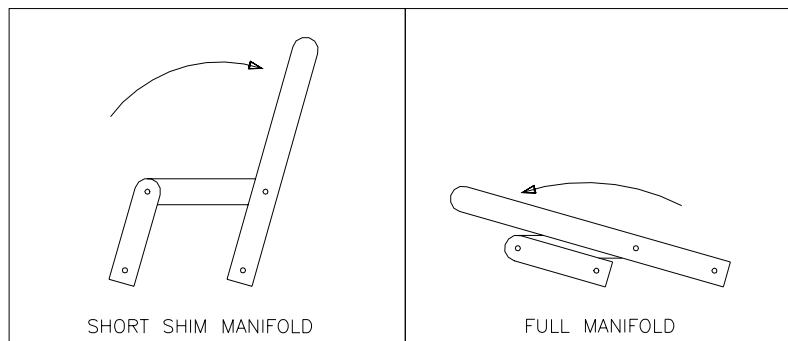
SHIM MANIFOLD SELECTOR VALVE SCHEMATIC
